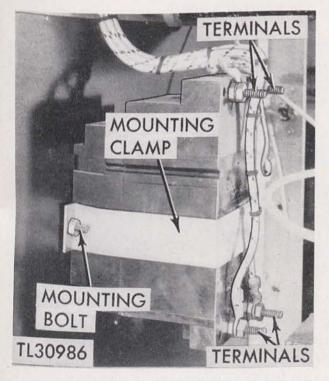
Keyer BC-758-A, removal of circuit breaker 54.
